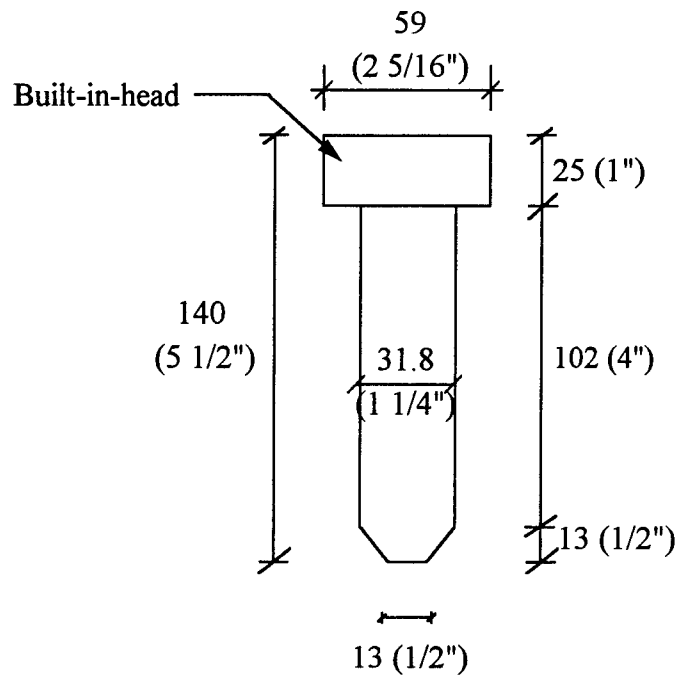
Dimensions of the Headed 31.8 mm (1 1/4 in.) Stud as Proposed by Continental Studwelding, Ltd.
